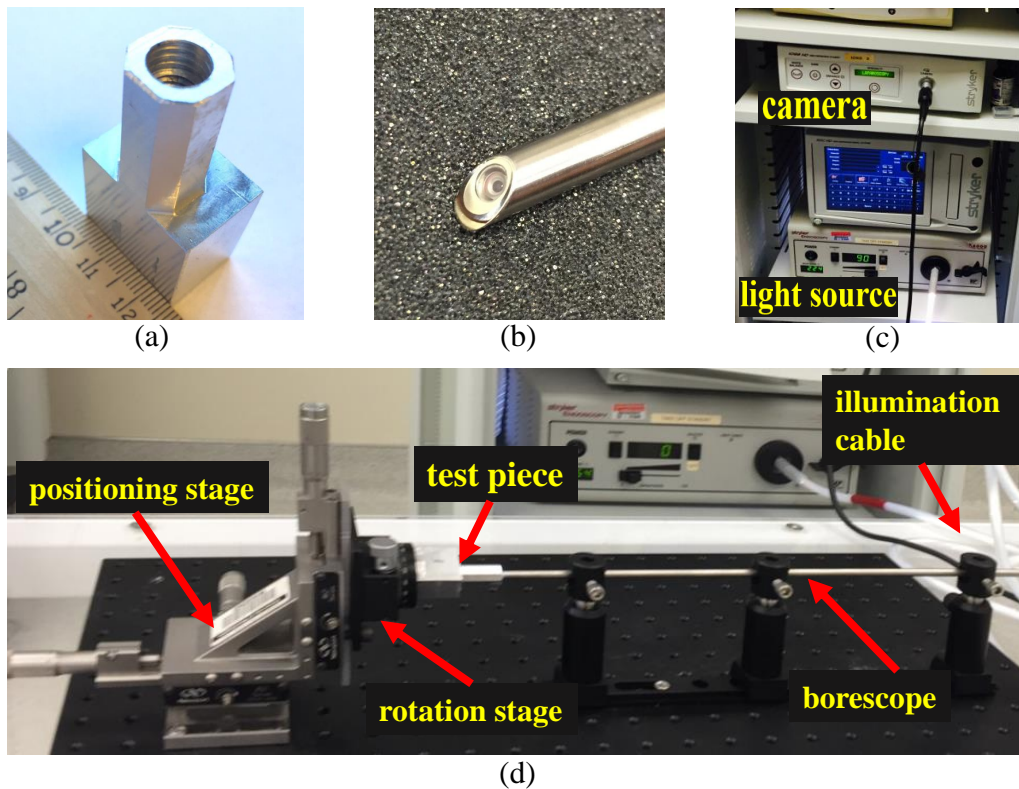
The experiment setup of 3D optical metrology of M8 threaded blind hole with commercial borescope. (a) The test piece with recessed coarse M8 threads machined in shiny aluminum metal; (b) a commercial borescope of 45° side-view angle and with resolution of 1280 x 1024 pixels; (c) the camera and illumination source of the commercial borescope; and (d) the experiment setup mounted on an optical breadboard with components of micro-positioning linear and rotation stages, test piece, borescope and customized scope holders.
